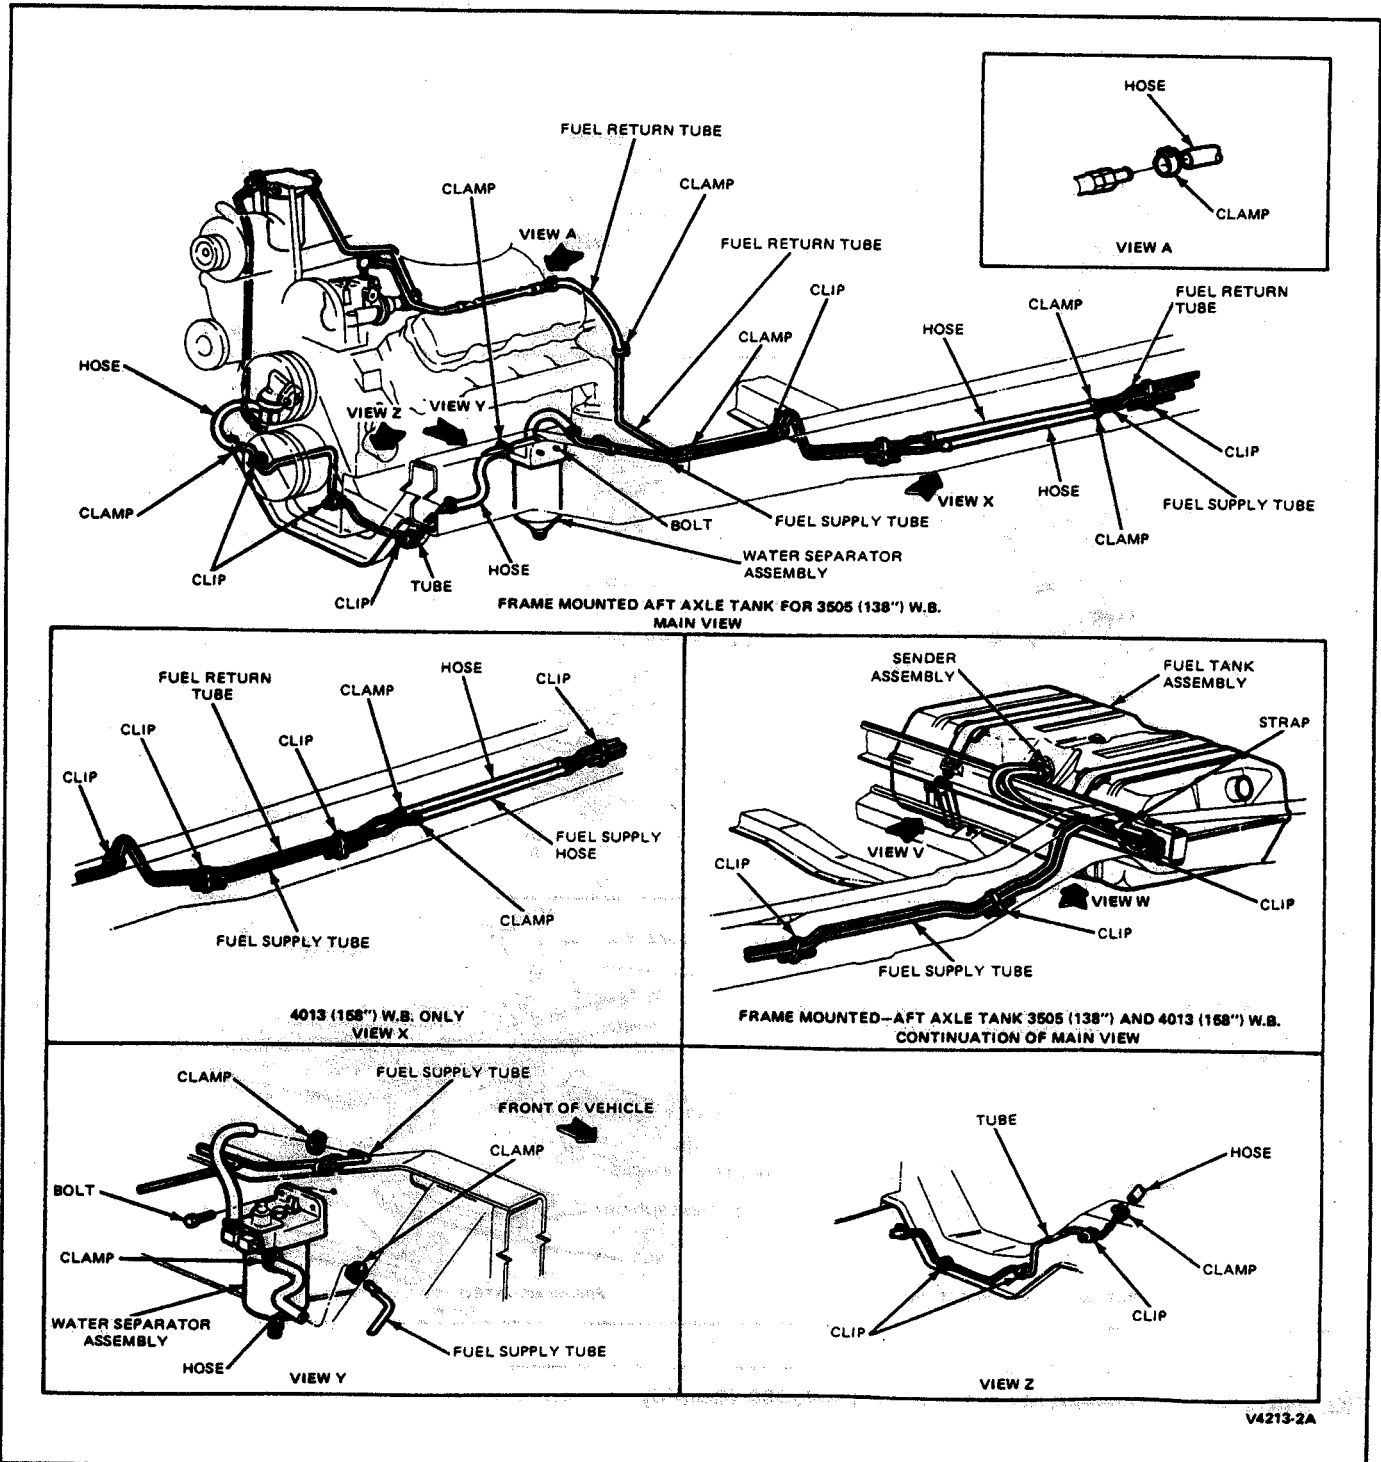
Fuel System—Aft Axle Tank—E-250—E-350
